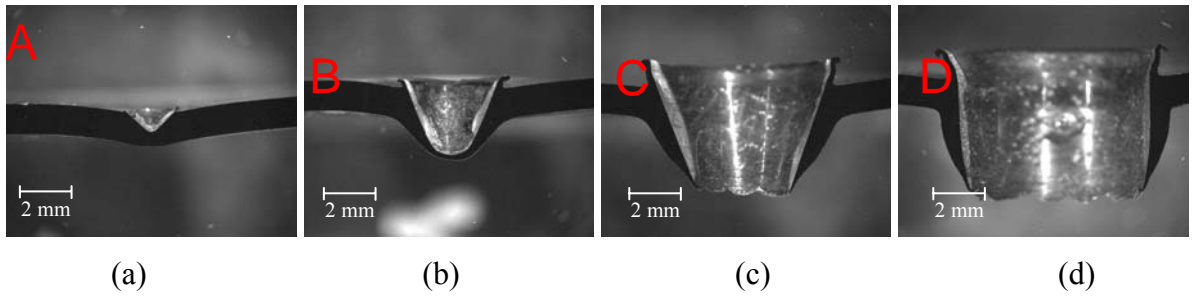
Cross sectional view of deformation of the workpiece in friction drilling at positions (a) A, (b) B, (c) C, and (d) D in Fig. 2.3.
